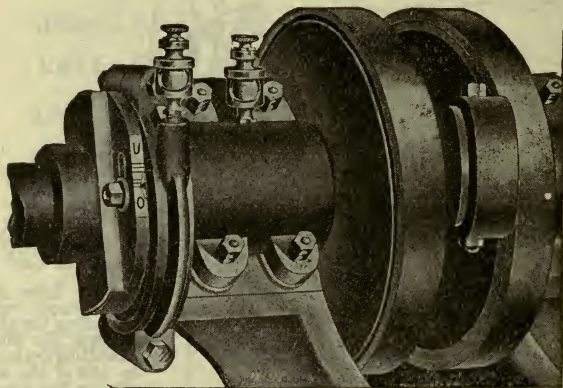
Leffel adjustable *shifting eccentric*. It consists of a hub plate keyed to shaft with valve eccentric bolted thereto, in a manner enabling adjustment of the cut off up to three-fourth stroke, or reversing motion of engine with same range of cut off.
